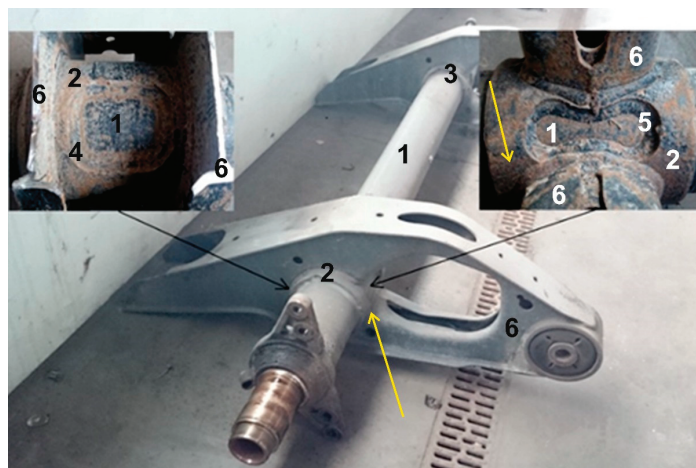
Mounting points for brackets and couplings: 1—axis; 2, 3—bushings; 4, 5—welds; 6—arm. The fracture origin area is pointed out by yellow arrows.
